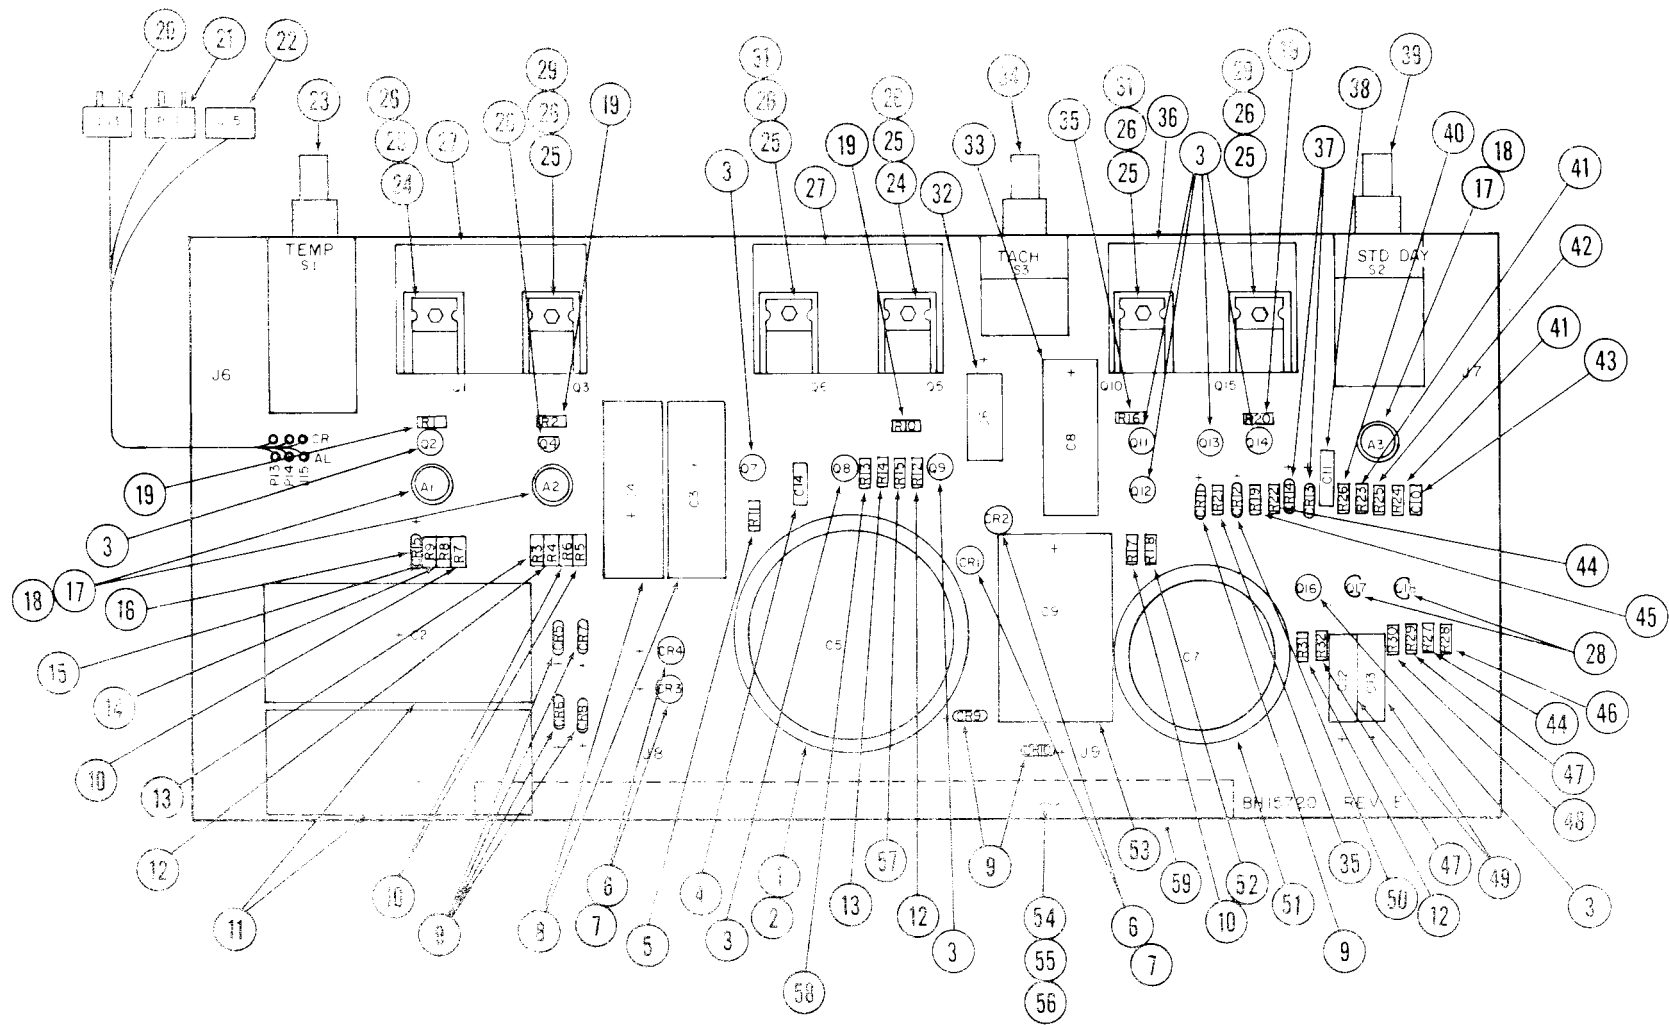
BH15720-3 Switch-Power Circuit Board Assembly.
